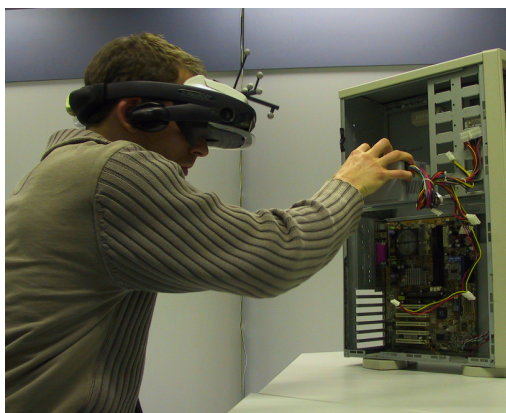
A Worker assembling a Control Unit using the presented Prototype.
